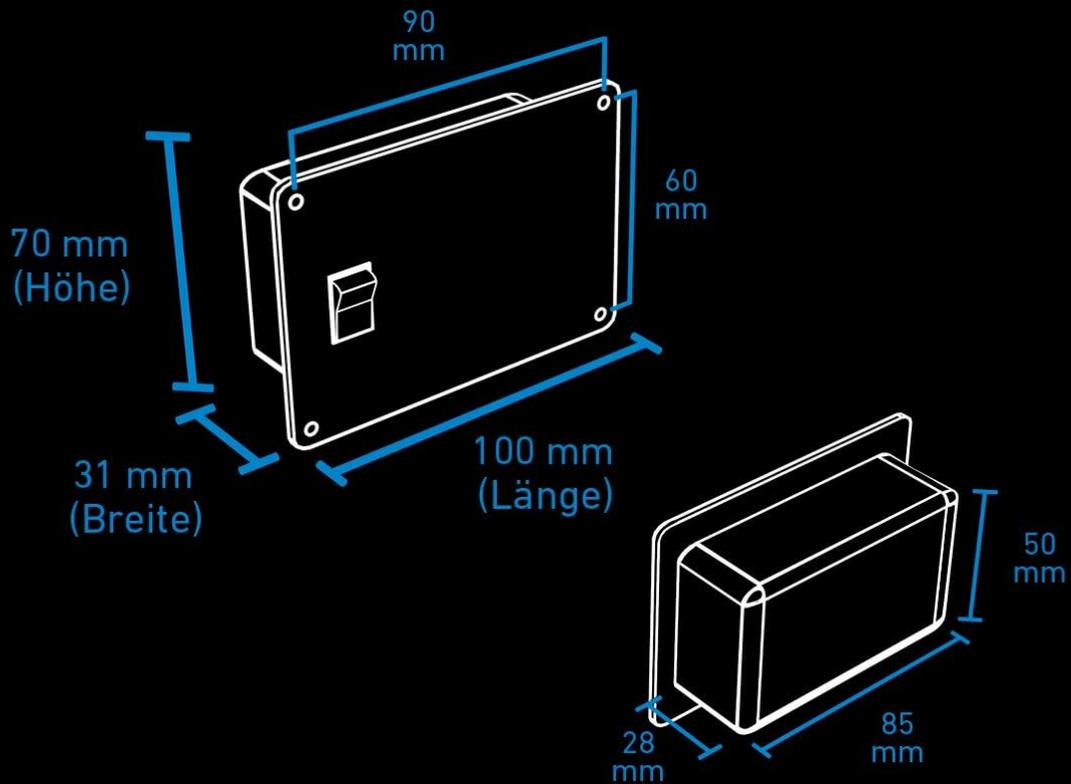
Dimensional diagram of the ECTIVE RC2 Remote Control, providing measurements for panel cutout and overall unit size.
